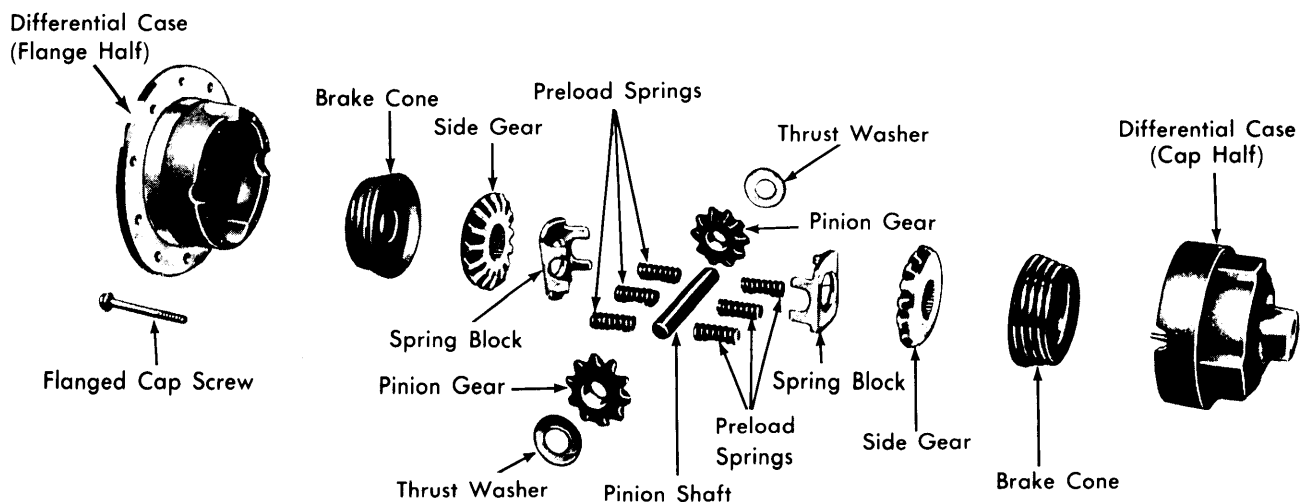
Exploded View of Warner-Motive Differential Assembly (Typical Cone Brake Type)
